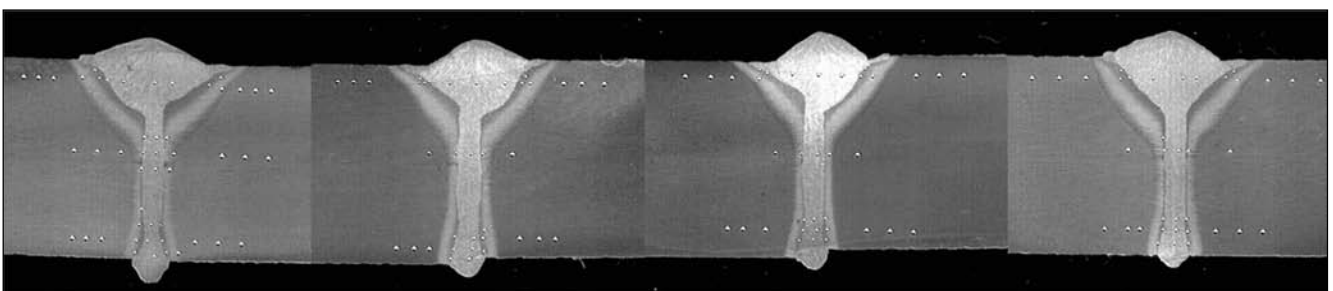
The effect laser beam on weld bead geometry: a) 10 kW, b) 11.5kW, c)12.4 kW, d)13 kW
